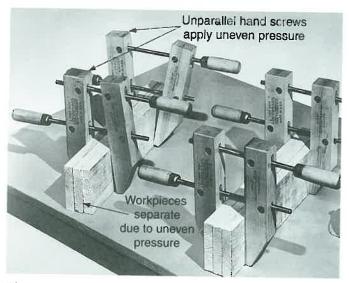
Hand screw jaws should be adjusted parallel with the surfaces. Notice how clamped assembly at left has separated because of uneven pressure. (*Adjustable Clamp Co.*)
